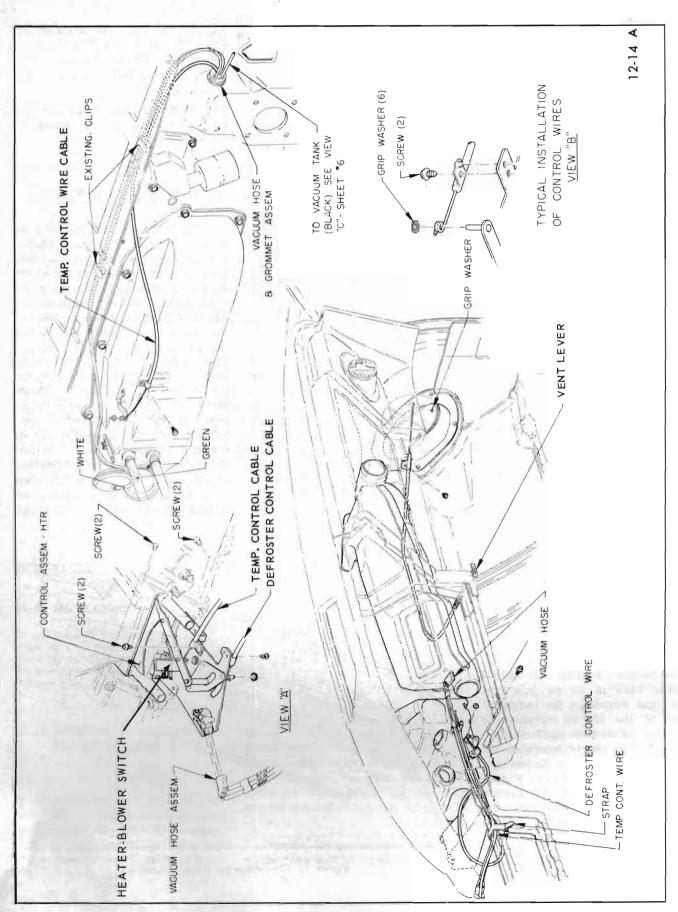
Vacuum Line and Control Cable Installation - 49000 Series
